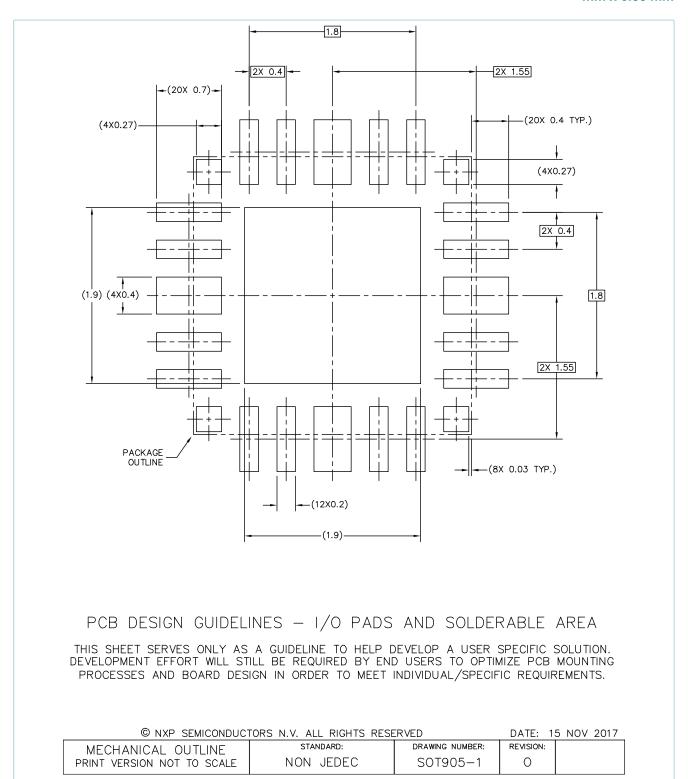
Reflow soldering footprint part2 for HVQFN24 (SOT905-1)
